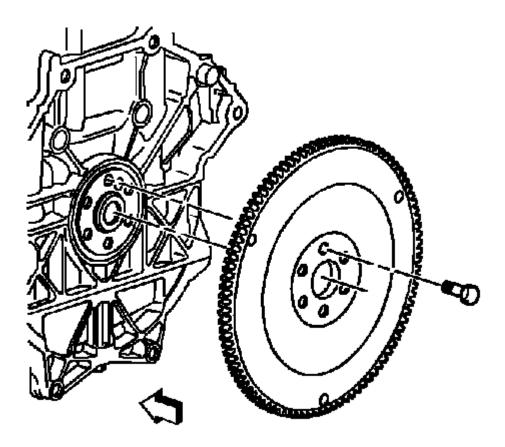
Identifying Flywheel & Retaining Bolts Courtesy of GENERAL MOTORS CORP.
